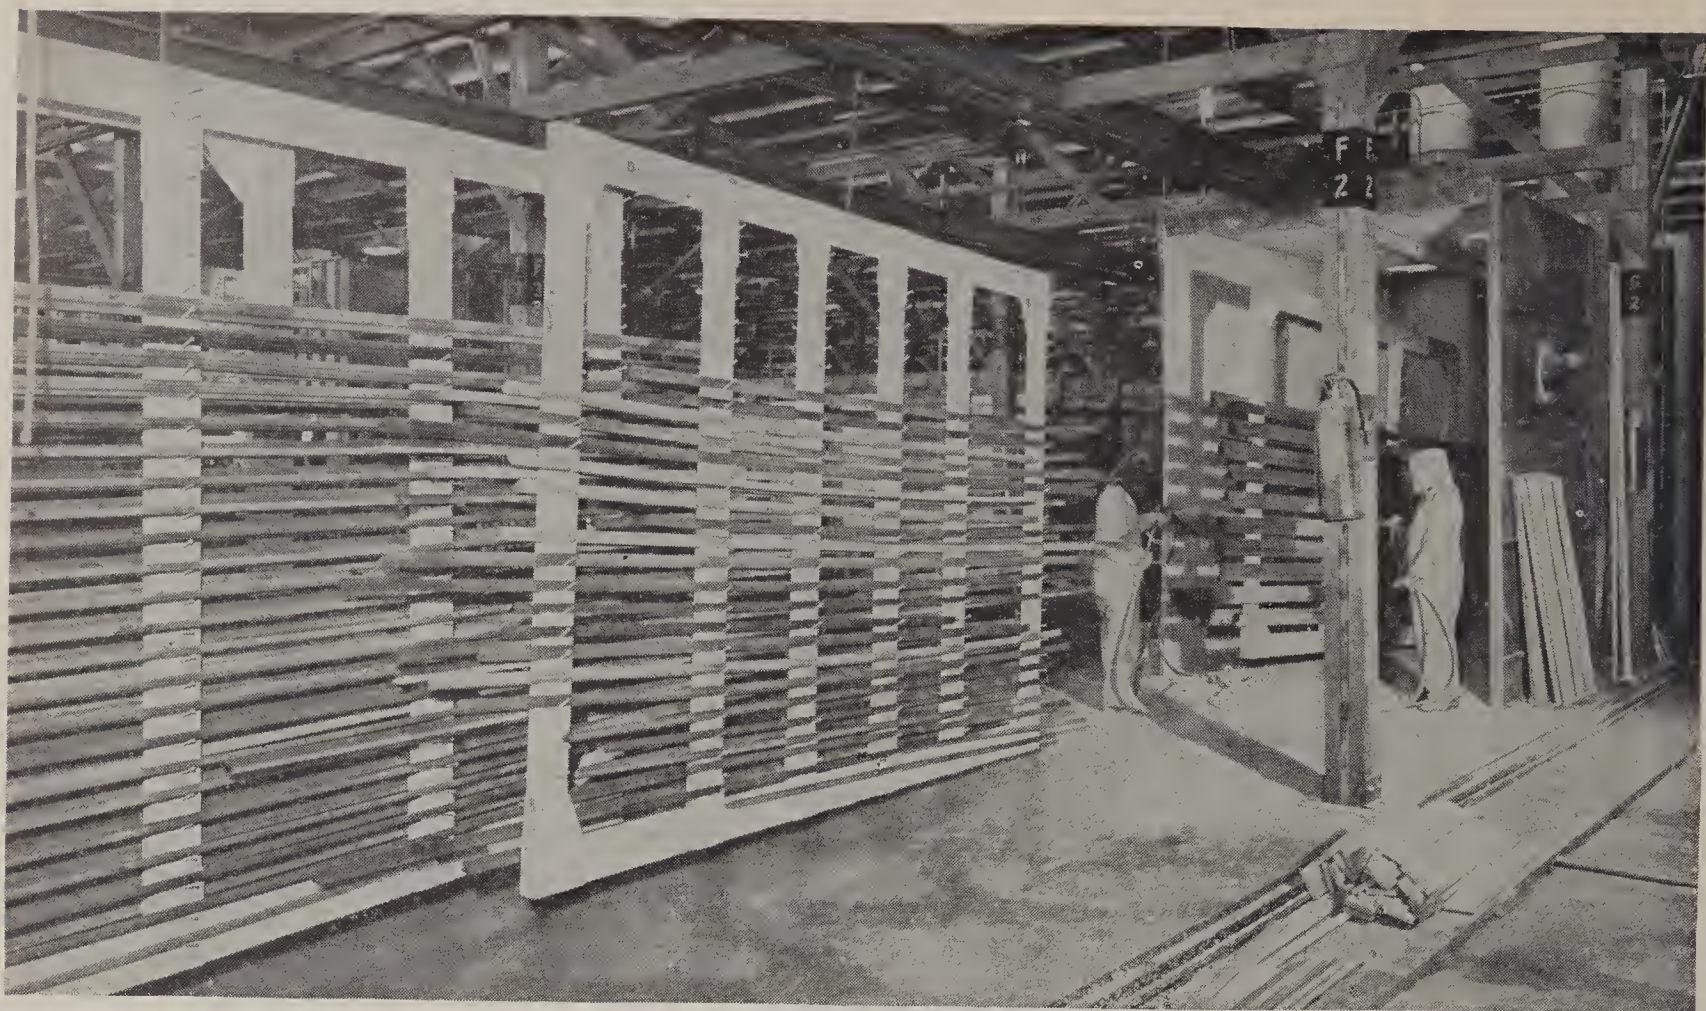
Special racks on conveyor system used to move millwork through a spray booth for painting.
